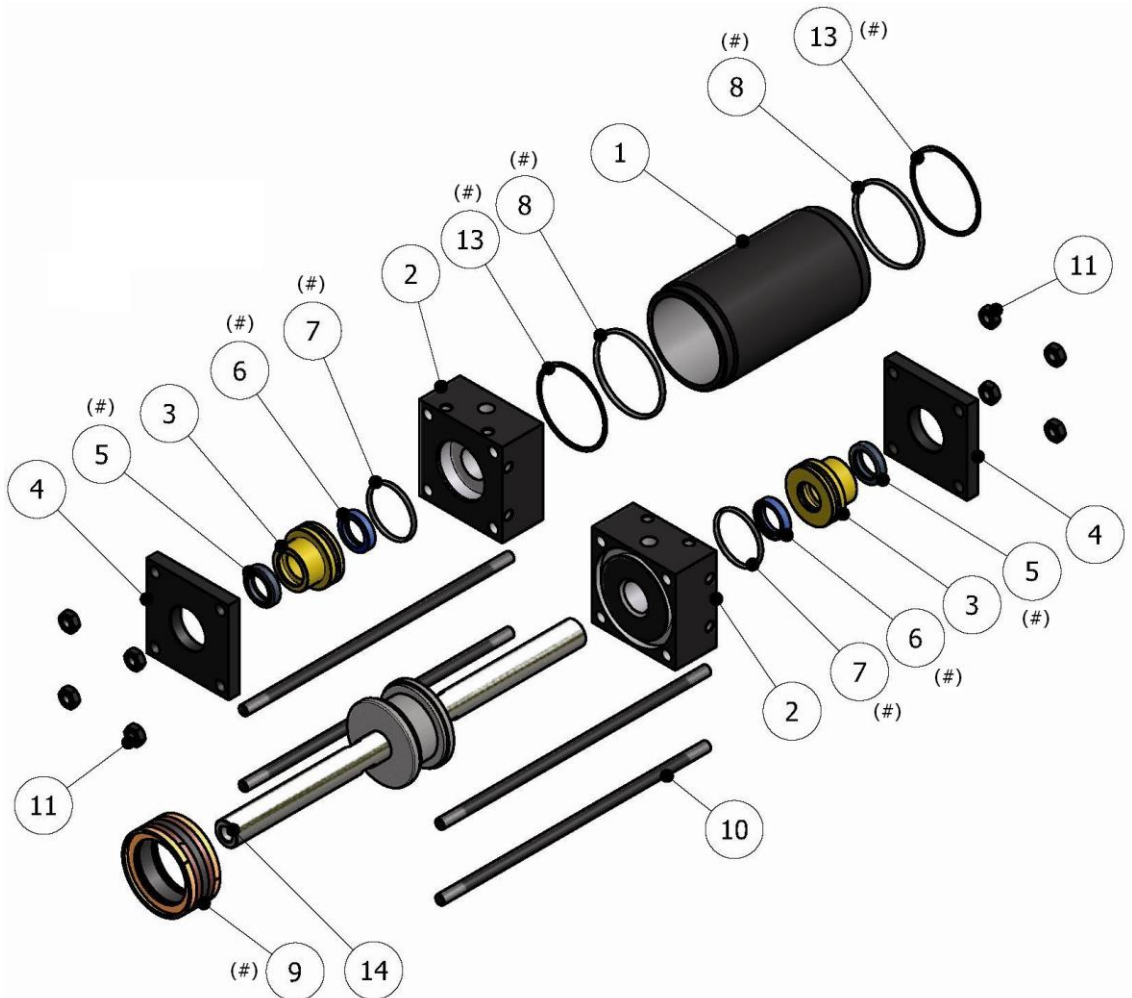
Hydraulic Cylinder with Spacers, Exploded View
